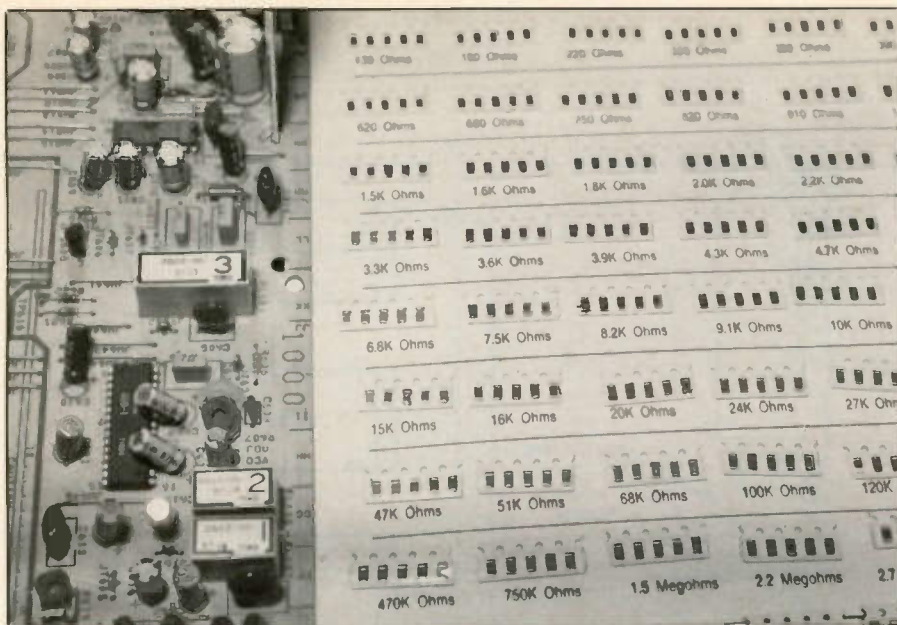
Replacement of SMD components may be purchased for a particular chassis from the manufacturer. This card contains SMD parts for the RCA GPR 2639 P TV chassis.
